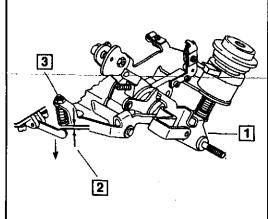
FAST IDLE SPEED ADJUSTMENT
